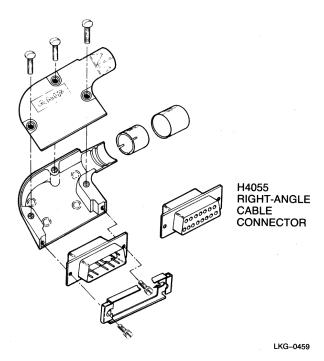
H4055 Transceiver Cable Right-Angle Connector Kit
